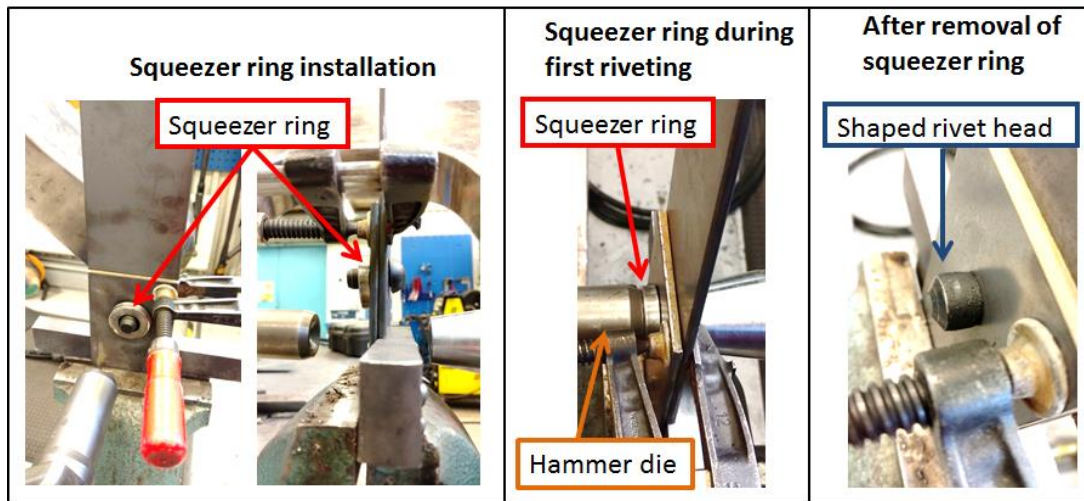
Step 1: Create preliminary clamping with use of squeezer ring.
